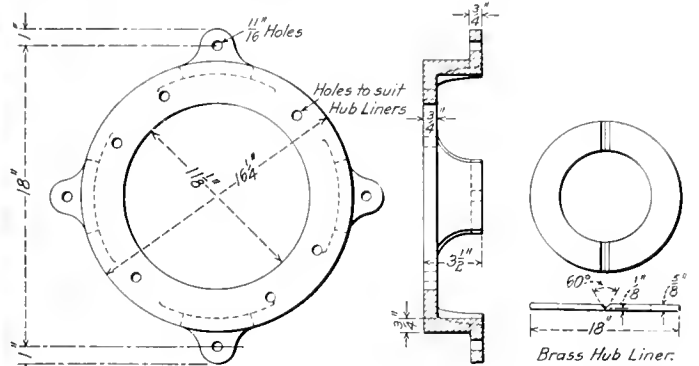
Hub Liner for Driving Wheels and Jig for Machining It.
